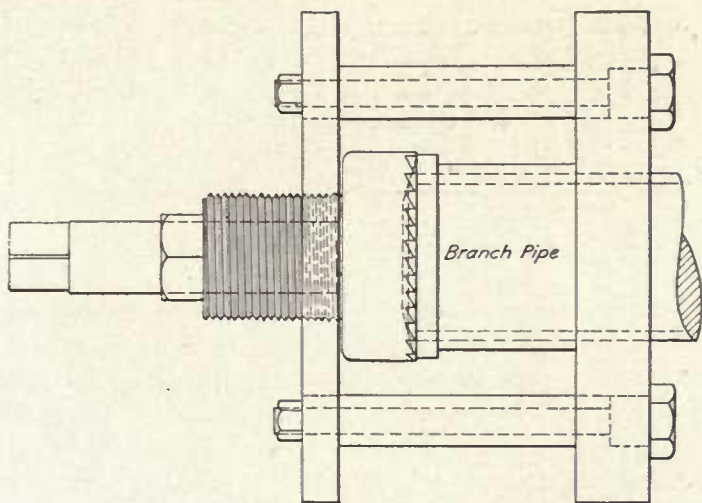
Assembled View of Check and Branch Pipe Joint Reamer.
